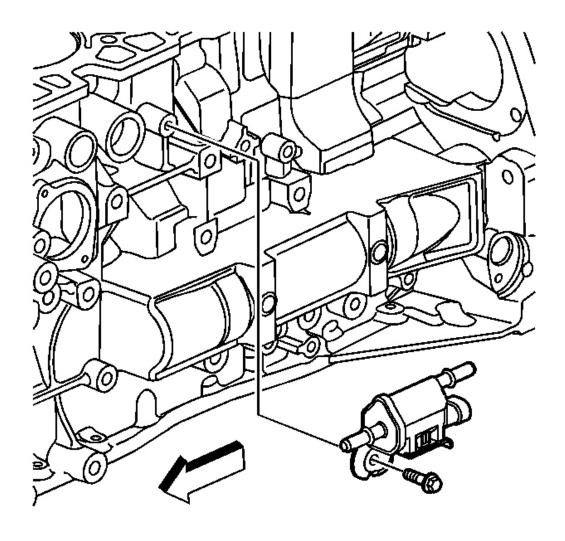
View Of EVAP Solenoid Courtesy of GENERAL MOTORS CORP.
